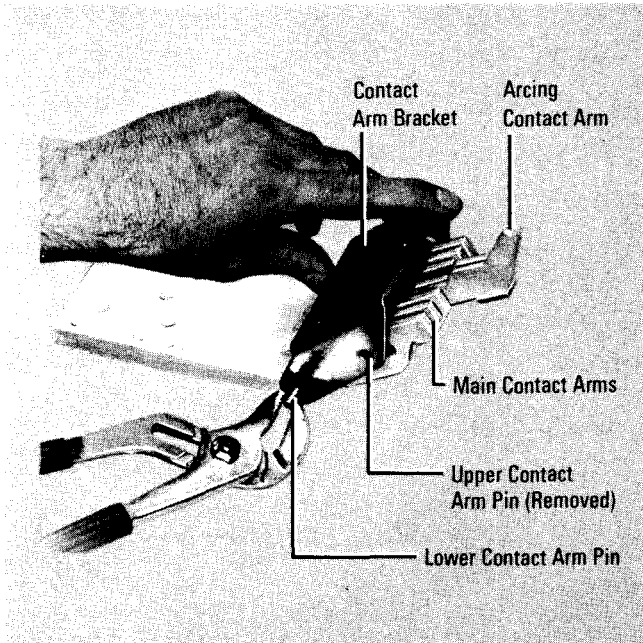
Removal of Lower Contact Arm Pin From Single Pole Conductor Sub-Assembly.
